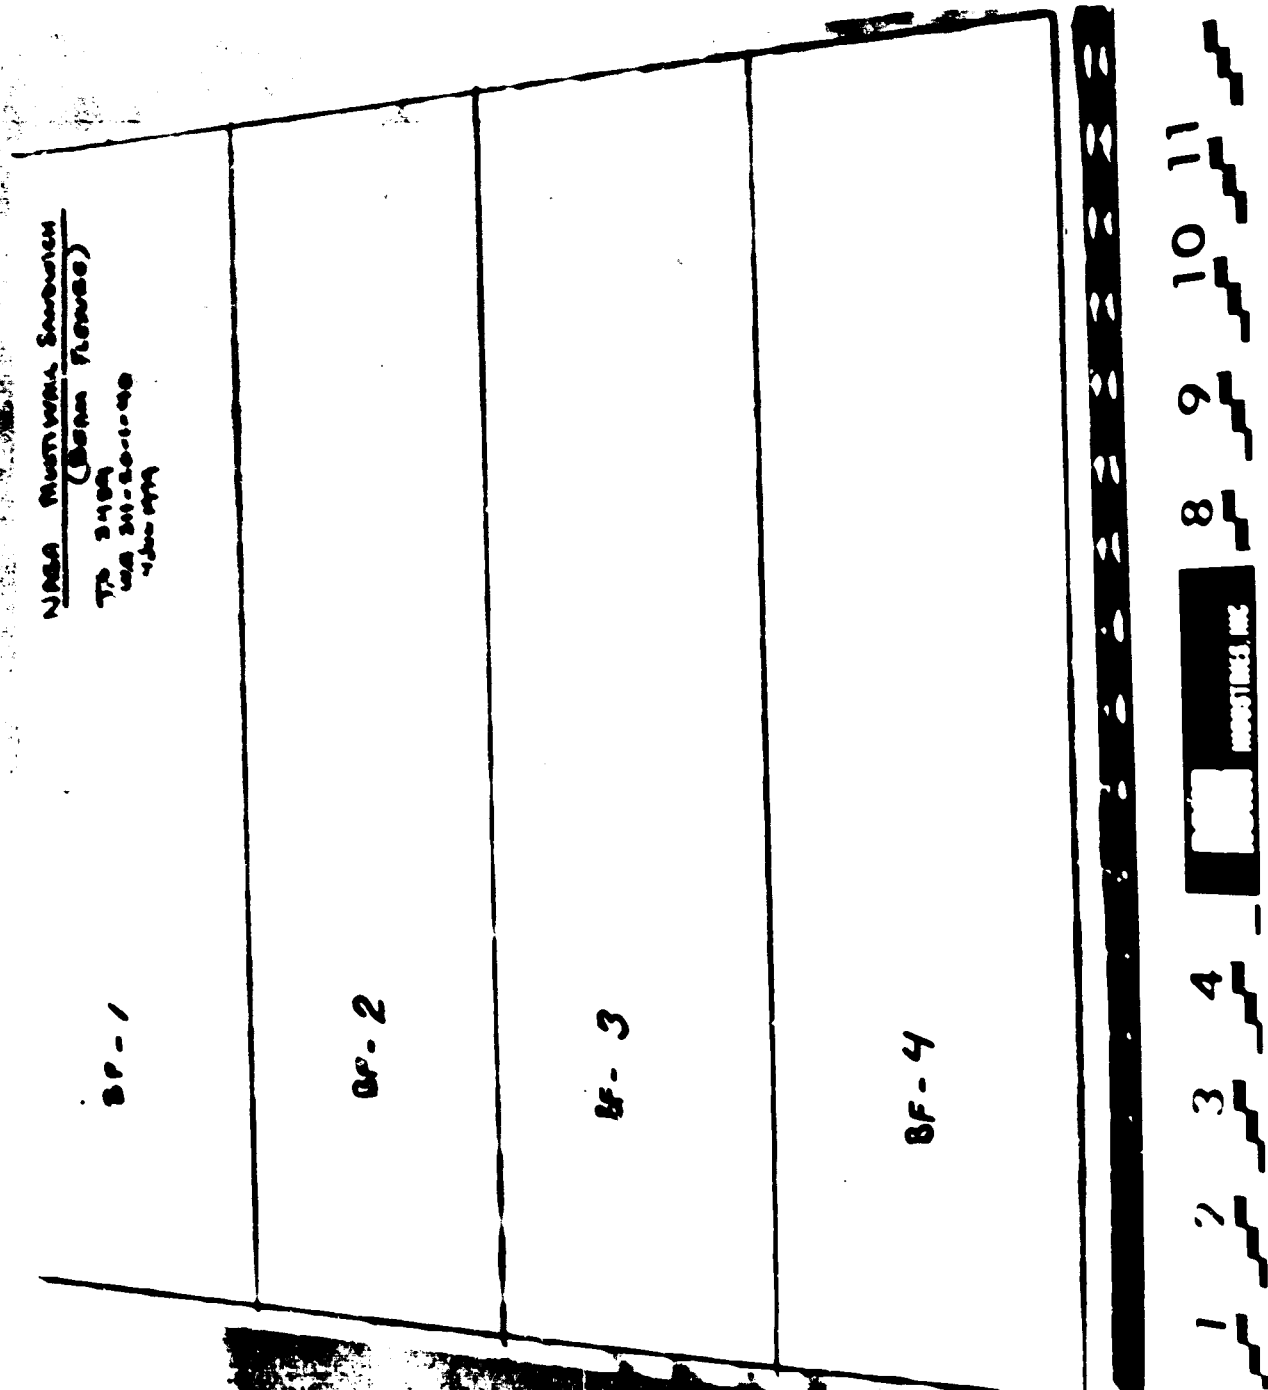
Beam Flexure Test Specimens Layout for Cutting Beam Flexure Test Specimens
